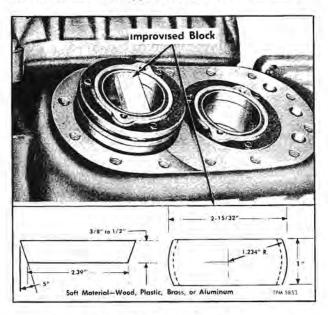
Using Improvised Block To Remove Suction Valve and Liner
